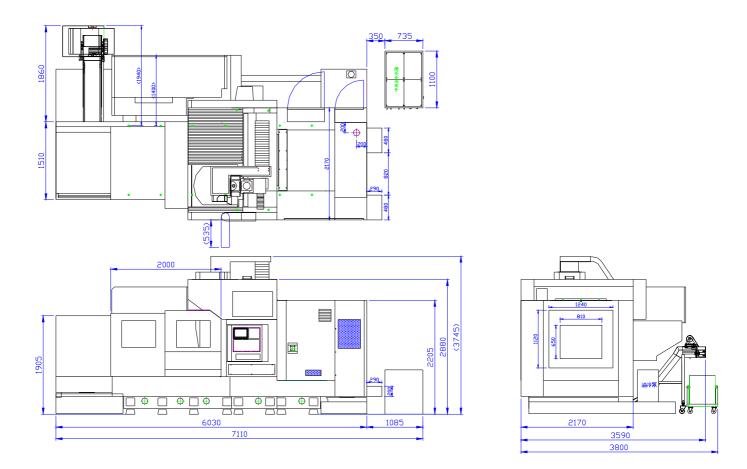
APPEARANCE AND PRINCIPAL DIMENSION OF THE MACHINE
